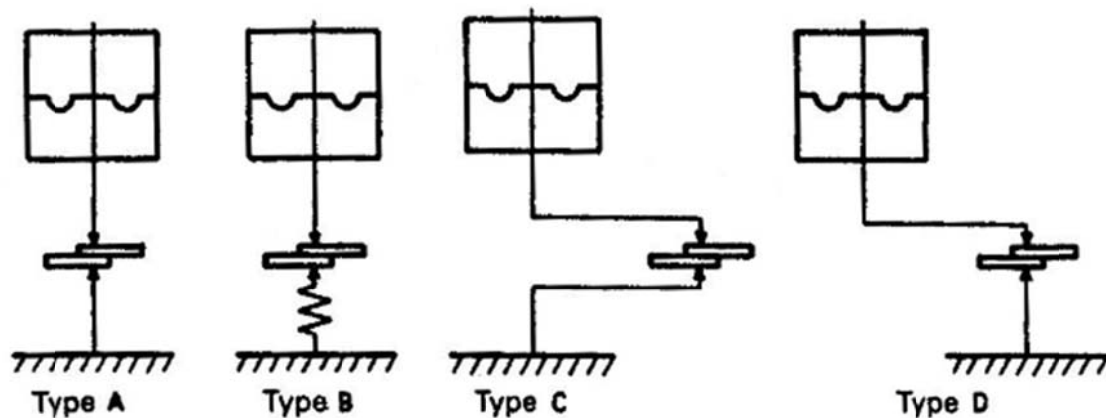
Four types of spot welding machine setups [28]
